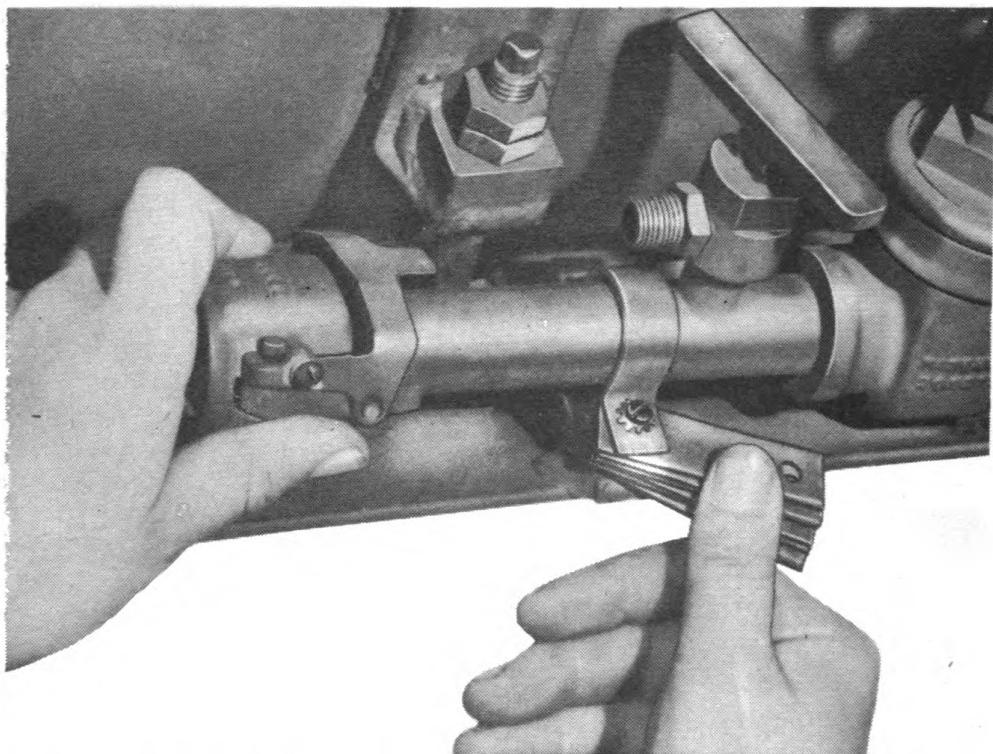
Clamp fillers being moved into position under fuel line. Clamp is in position on fuel outlet piping of sponson fuel group.
